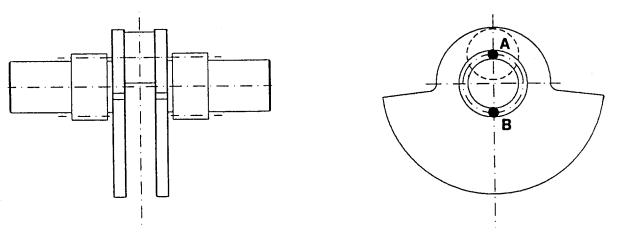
Planet crank composed of two planet gears and the big-end pin.
